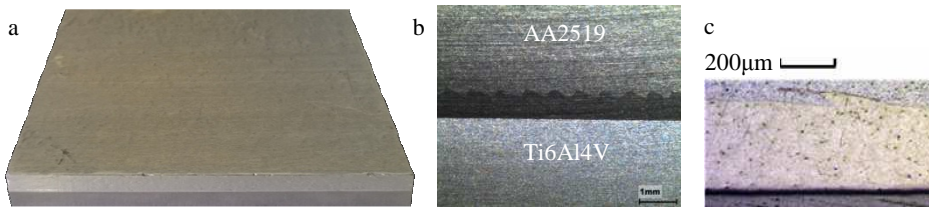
Al/Ti layered material made by explosive welding: a) general view, b) microstructure, c) connection zone
